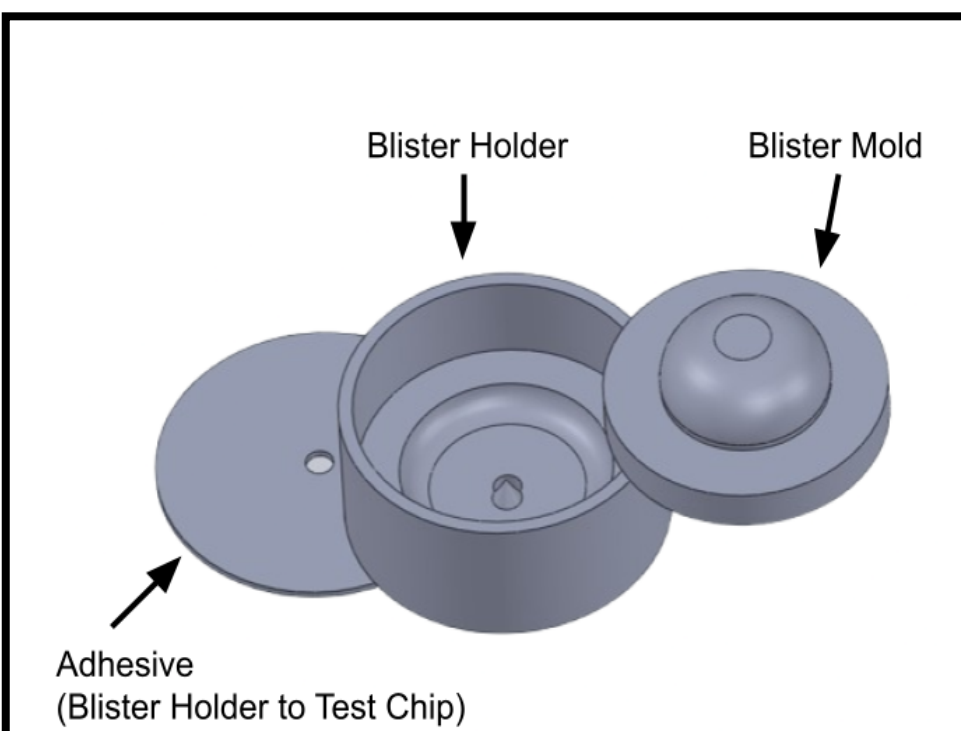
SolidWorks CAD model showing blister mold with cavity, holder, and adhesive.
